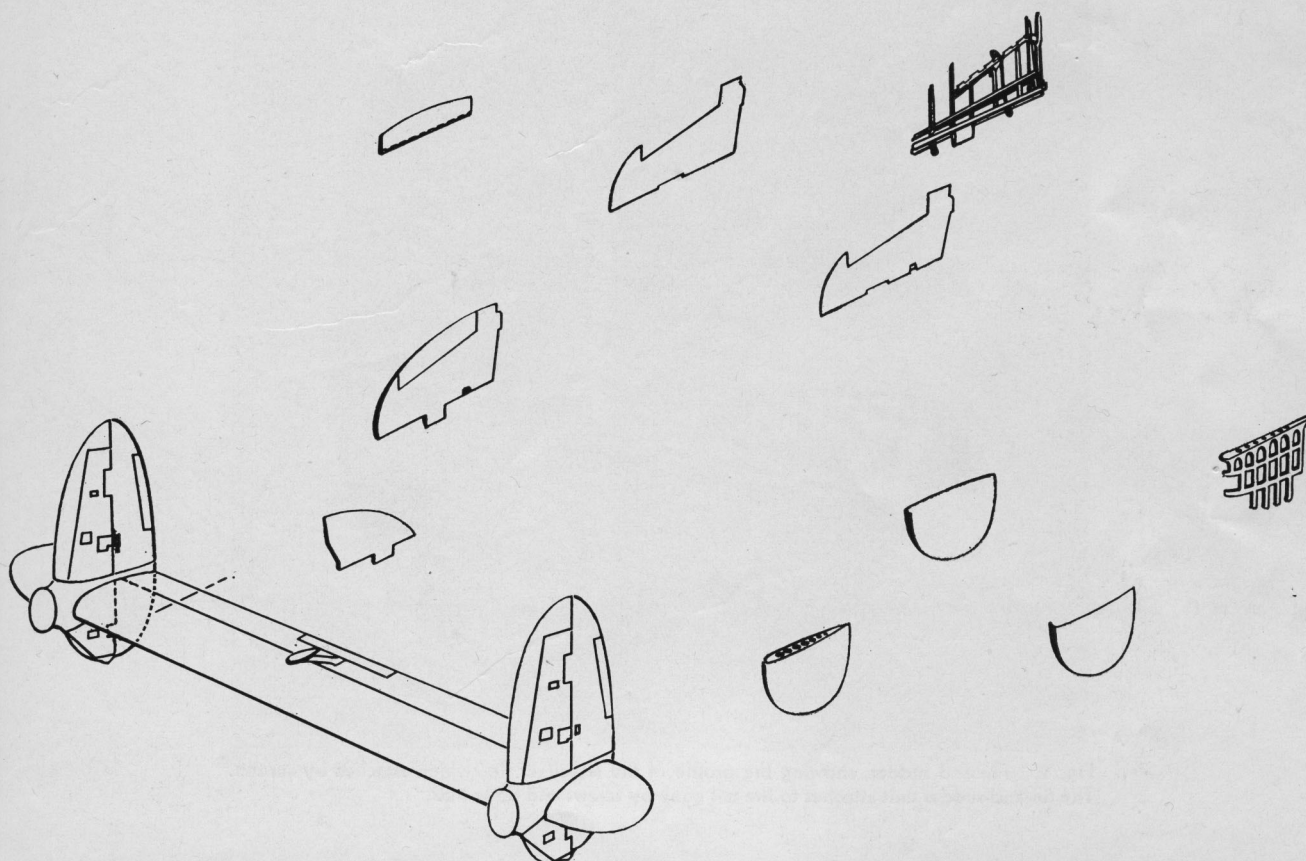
The detail sketches in the upper row show components in the rudder assembly, starting at the right with the frame assembly and including skins and tab to form the complete upper rudder. The lower rudder assembly is also shown. The lower row shows (right) stabilizer tip frame, then skins and the complete unit.
